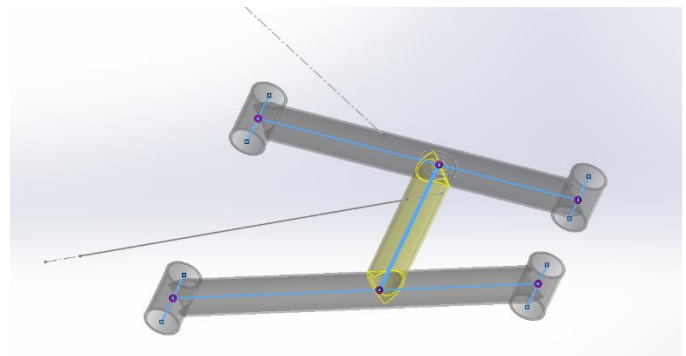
Weldments in SOLIDWORKS 2022
